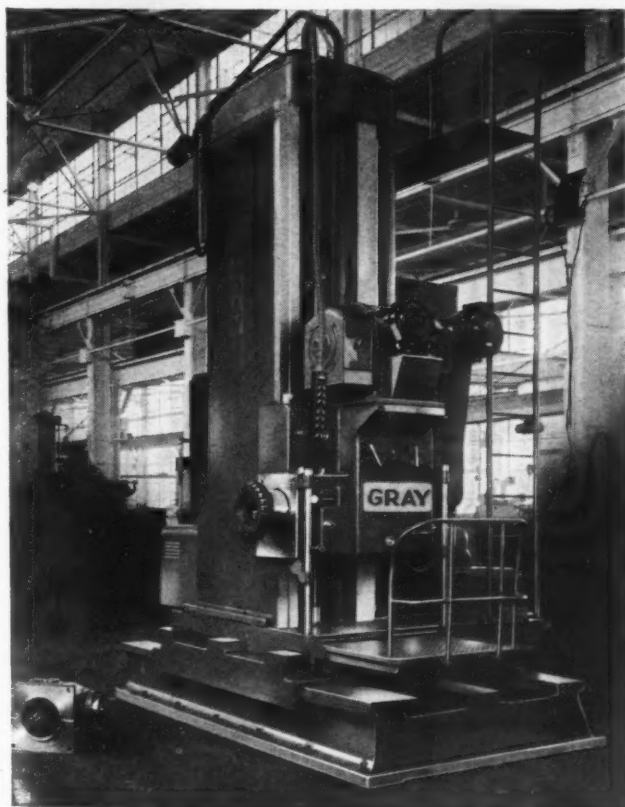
Gray Traveling-head Milling Machine with Column Fitted to Saddle
